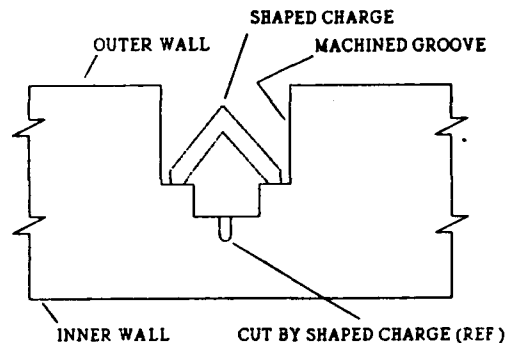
, Typical Vessel Cross Section Showing Groove and Shaped Charge
